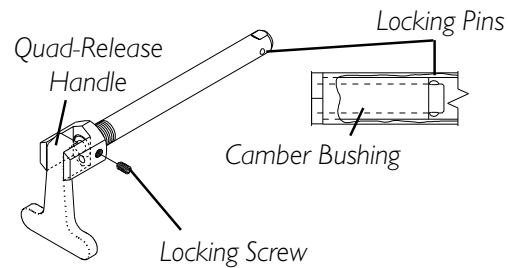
ADJUSTING QUAD-RELEASE HANDLE IN AND/OR OUT
